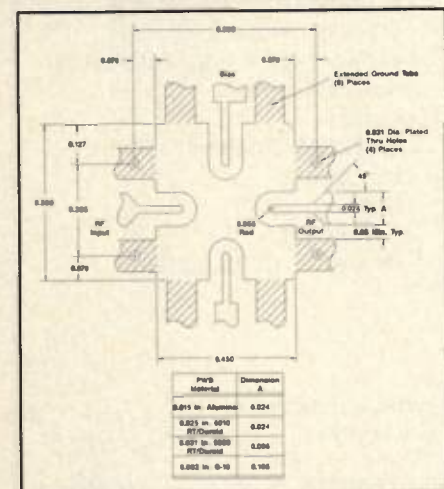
Printed-wiring-board layout: 4-hole configuration.
